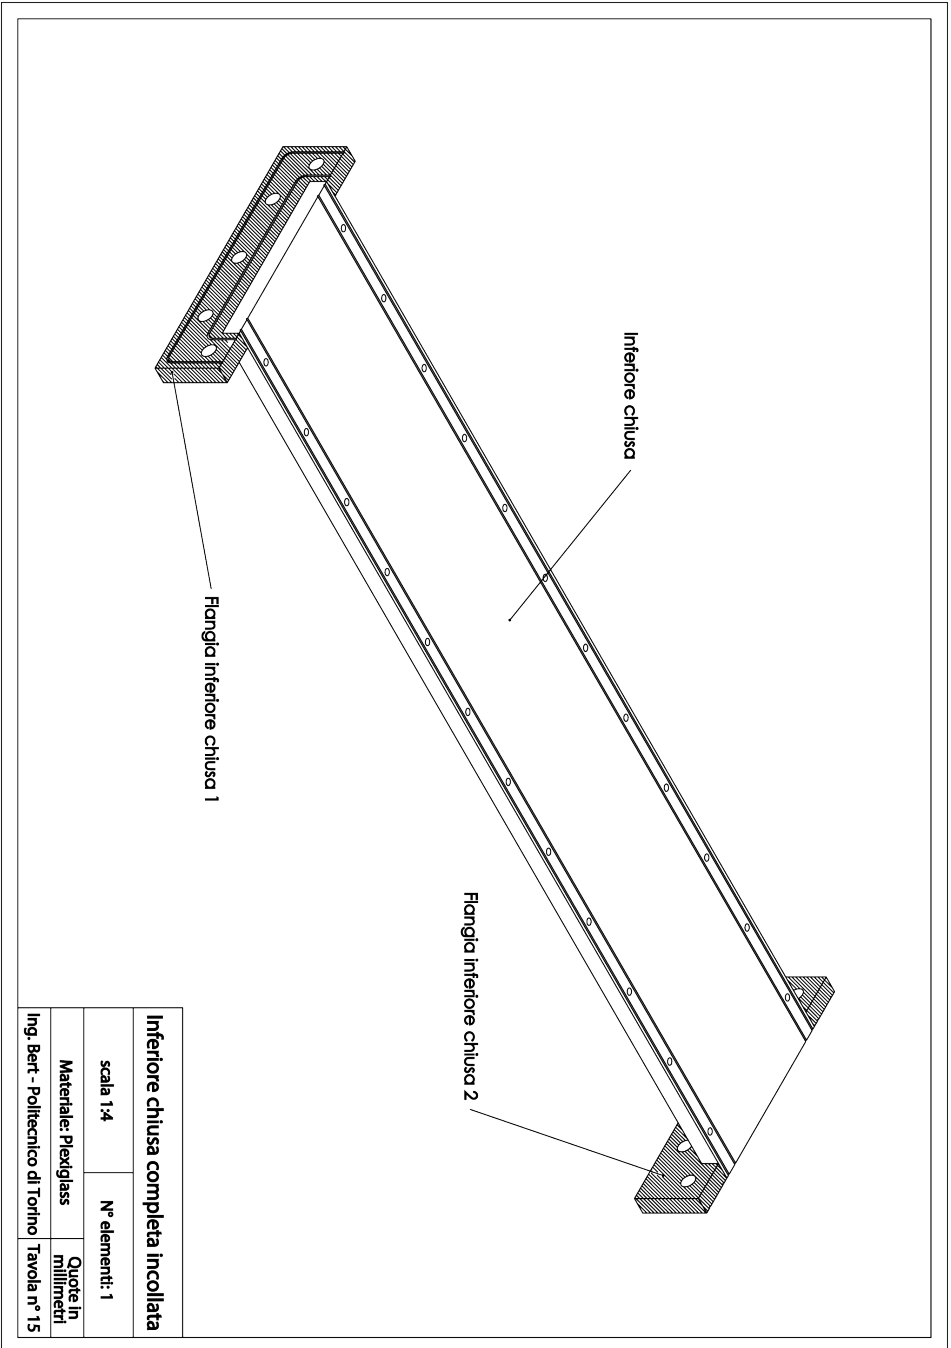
Assembly of the lower part of the test section for smooth-wall impermeable tests.
